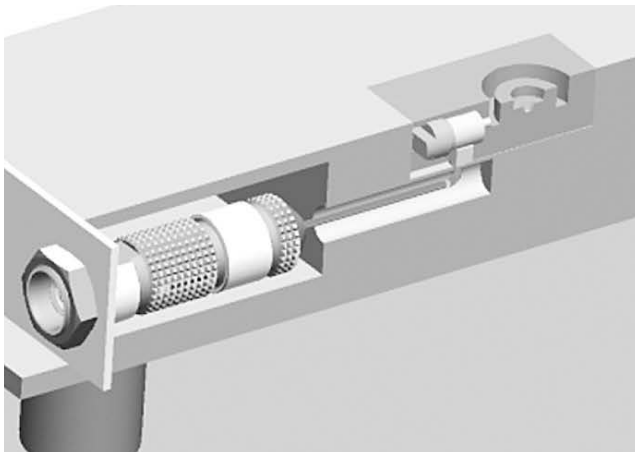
Installation from the side, sensor, cable, connector and mounting plate
